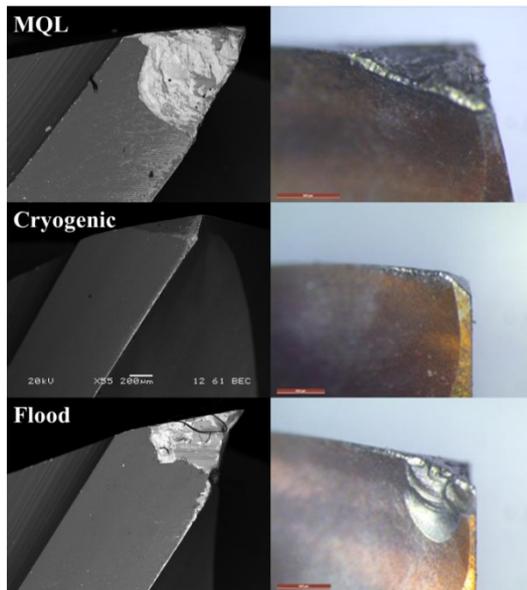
SEM micrographs of the flank (left) and rake (right) faces of the cutting tools used for machining experiment.
